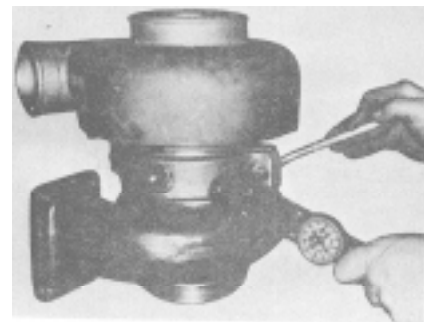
, T-421. Torquing "V" clamp bolts and nuts
